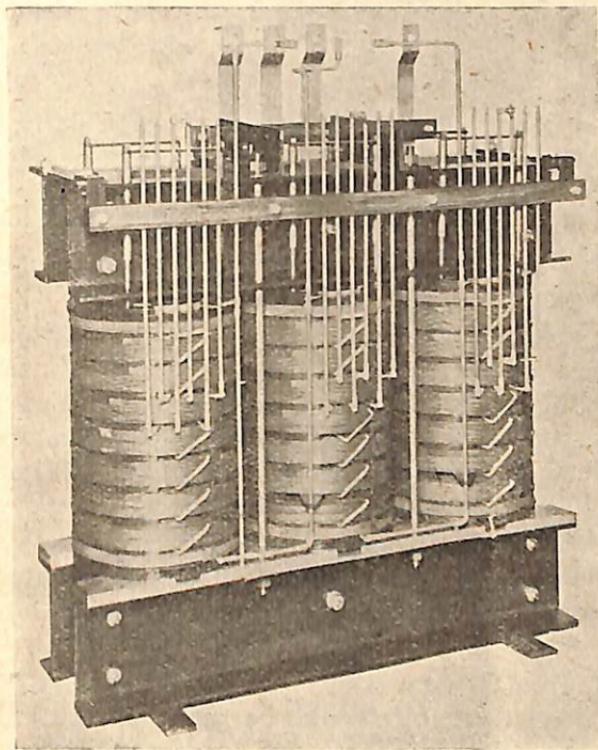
400 kVA, 3-phase, 6,600/430 V transformer, showing core and coils
